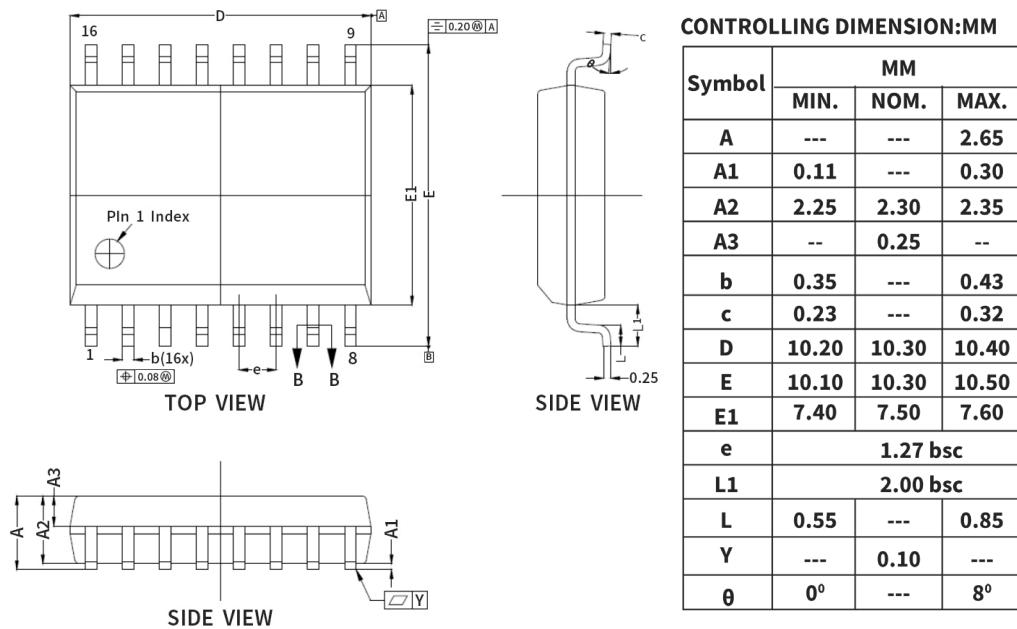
SOP16(300mil) Package Shape and Dimension in millimeters
